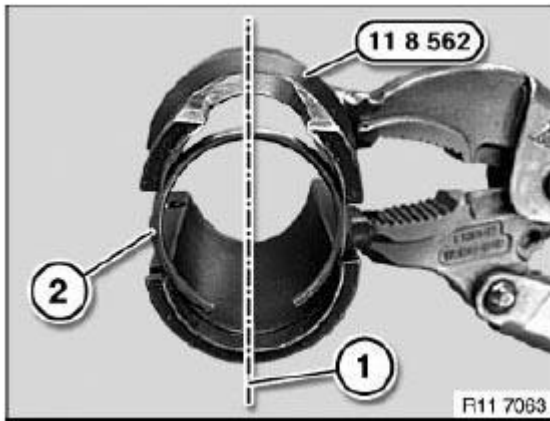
Inserting Piston Circlip Into Groove Of Special Tool 11 8 562
